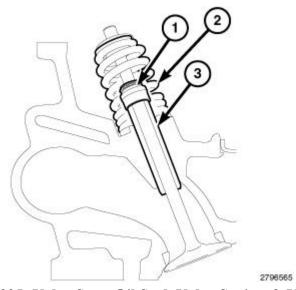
Valve Stem Oil Seal, Valve Spring & Valve Guide Courtesy of CHRYSLER GROUP, LLC
